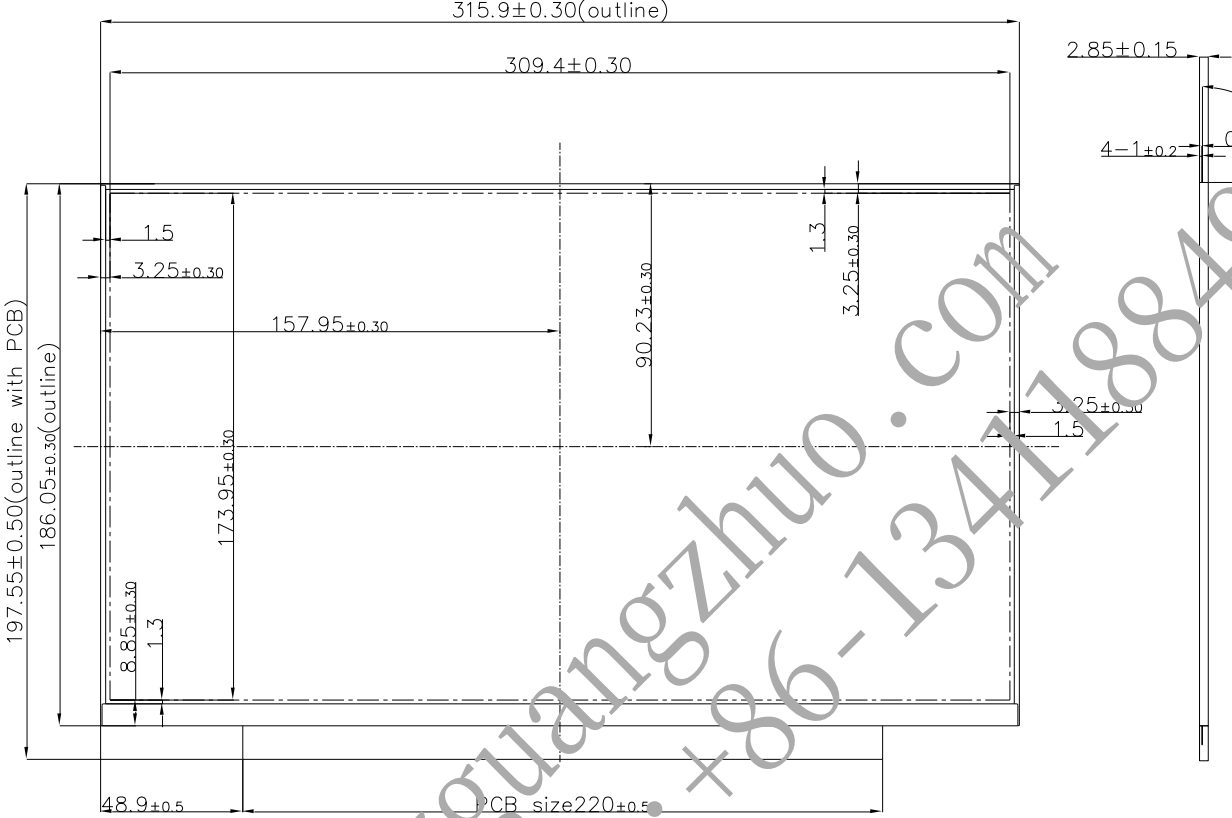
TTT-LCD Module Outline Dimension (Front View)
